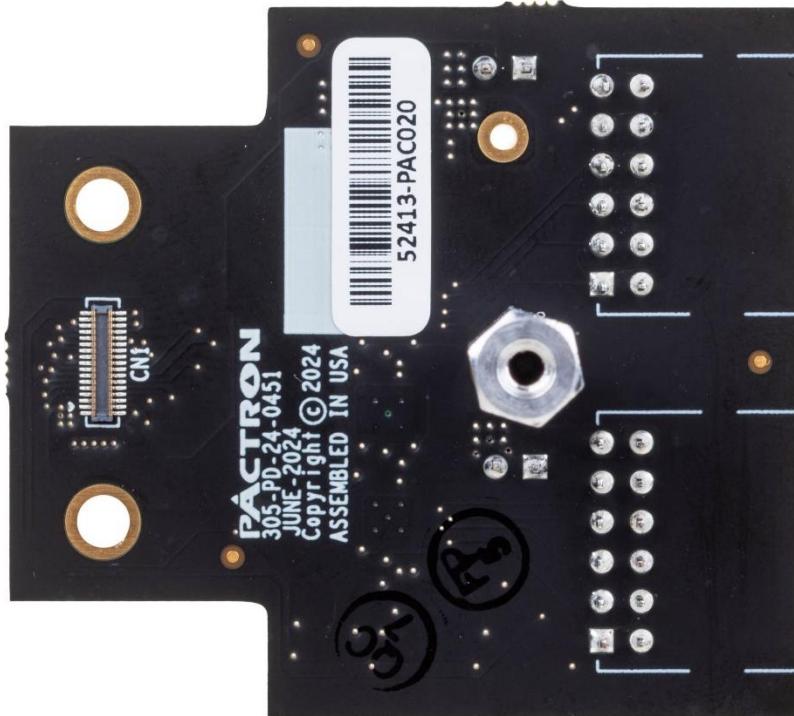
Bottom View of CrossLinkU-NX I/O Daughter Board
